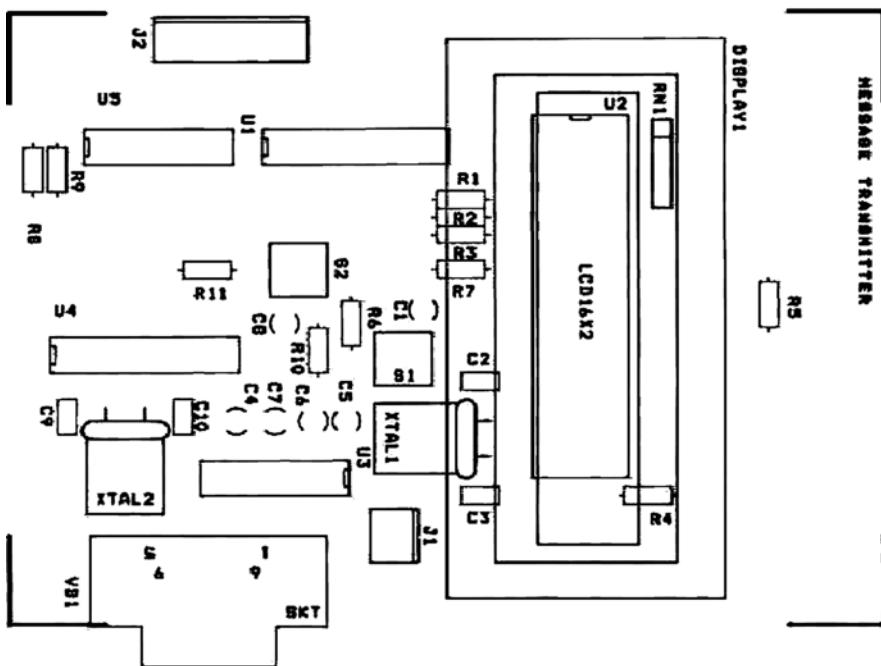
PCB (bottom layer) layout of wireless message device for mines
